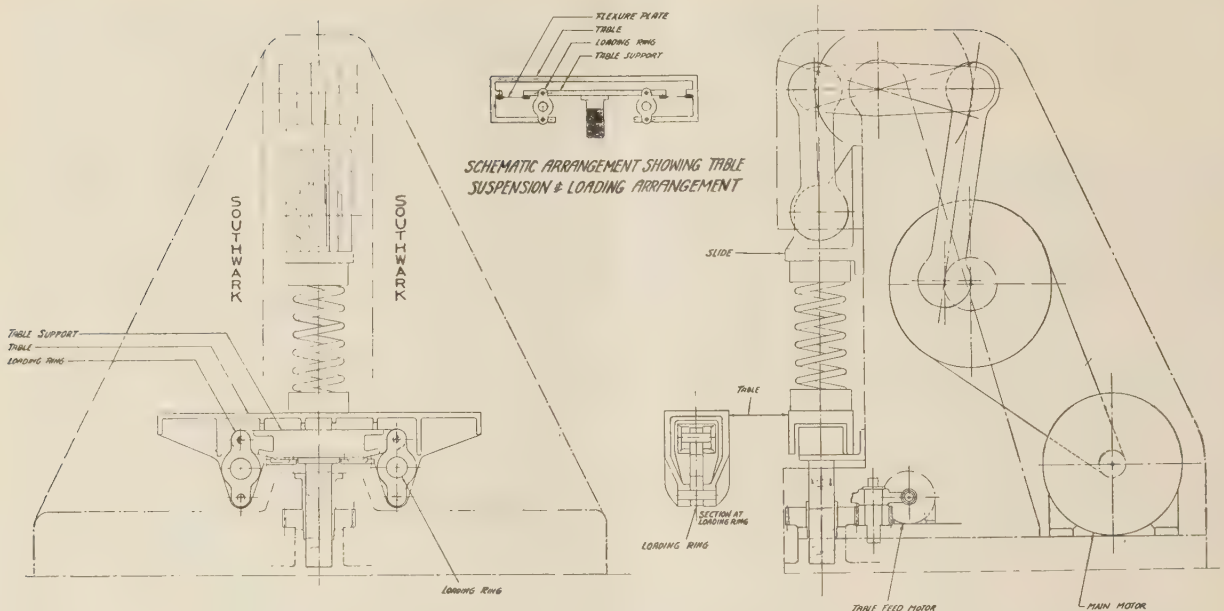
LIFE TEST AT CONSTANT LOAD ON SPECIAL MACHINE
